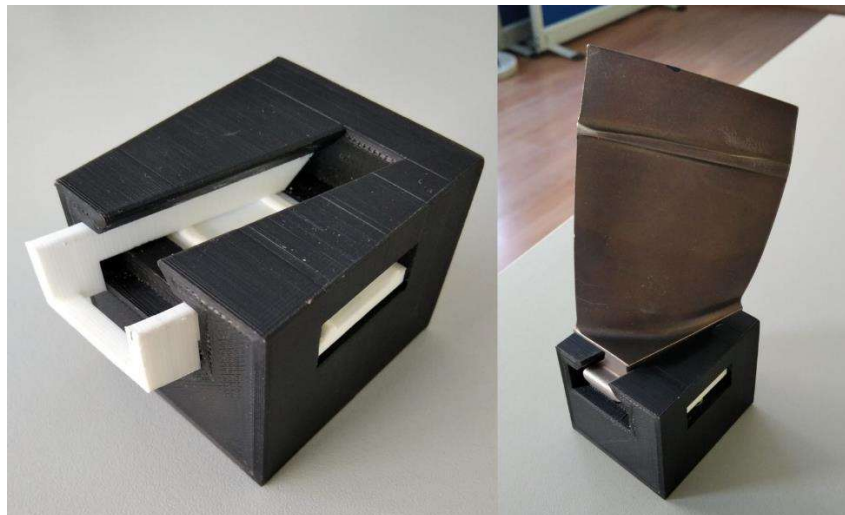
1<sup>st</sup> Stage Tool Prototype completed with the Spacer
